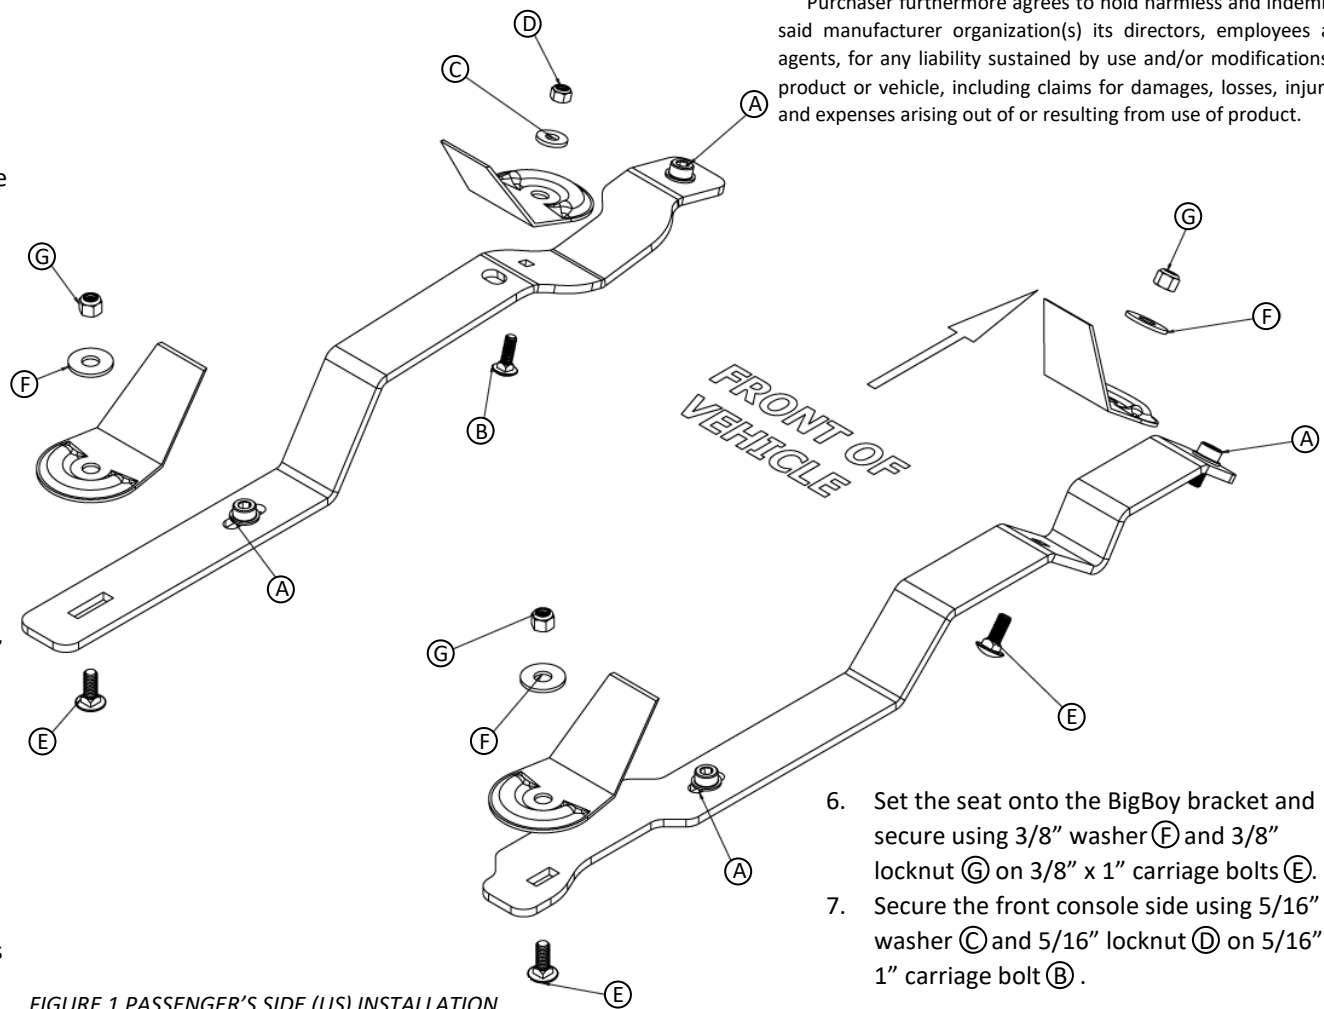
PASSENGER'S SIDE (US) INSTALLATION
